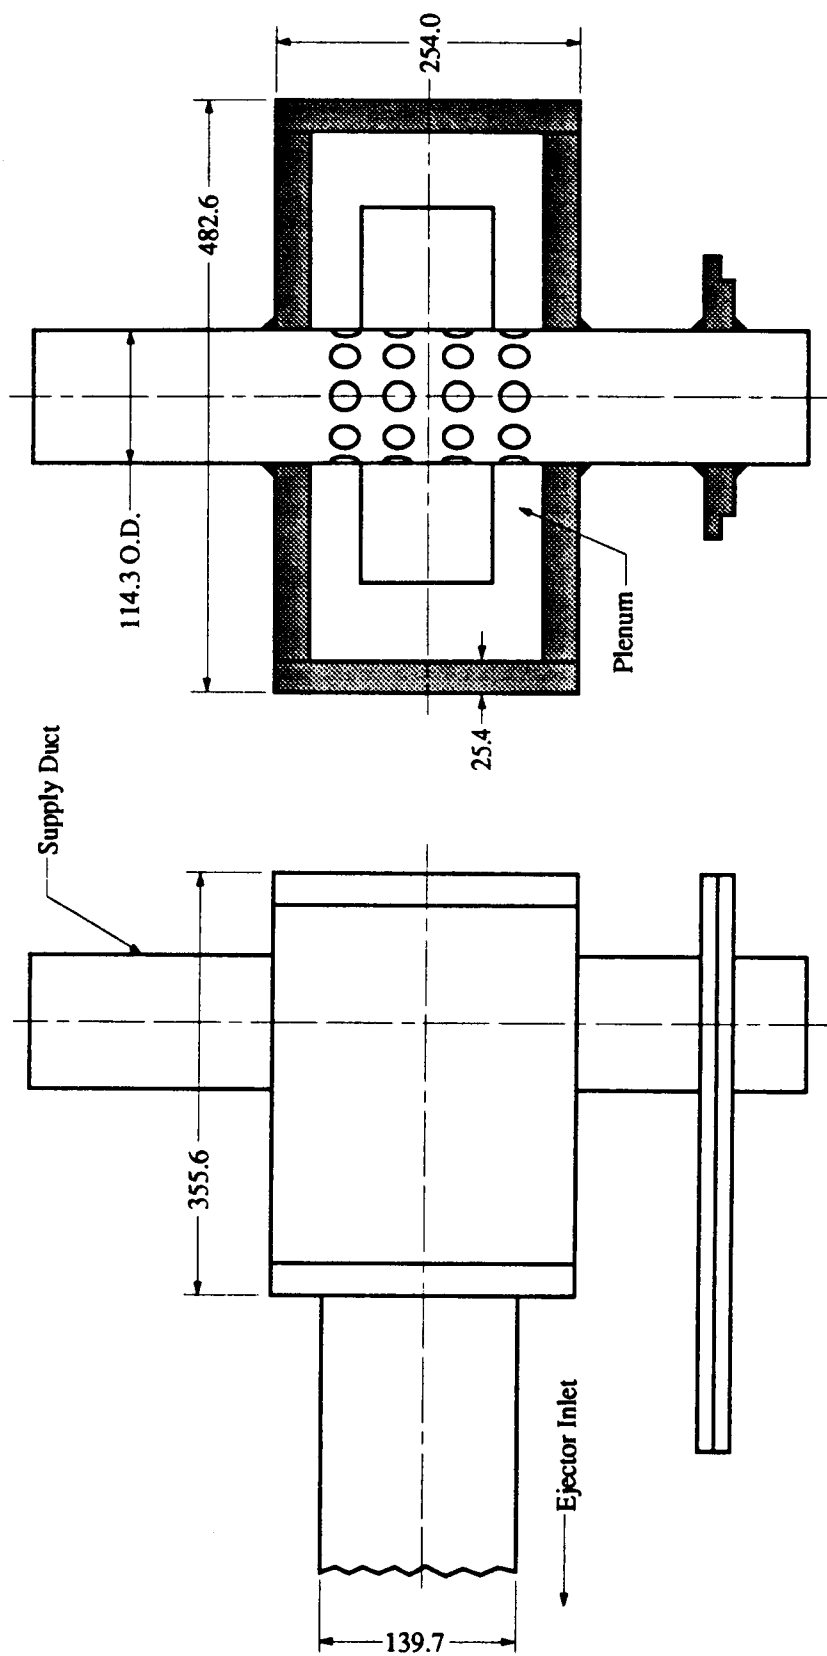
Secondary air plenum with vertical perforated pipe. All dimensions in millimeters.
